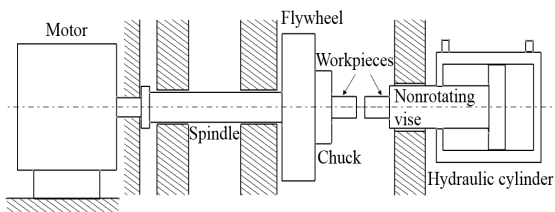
Schematic diagram of a typical inertia friction welding machine<sup>[11]</sup>
